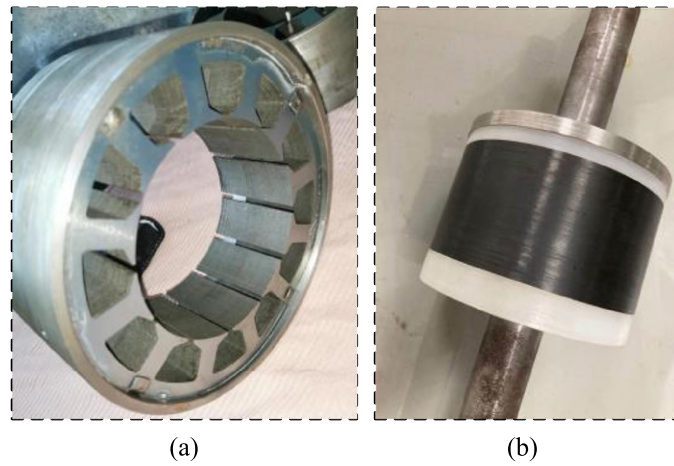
The stator and rotor of the prototype machine. (a) Stator; (b) Rotor.
